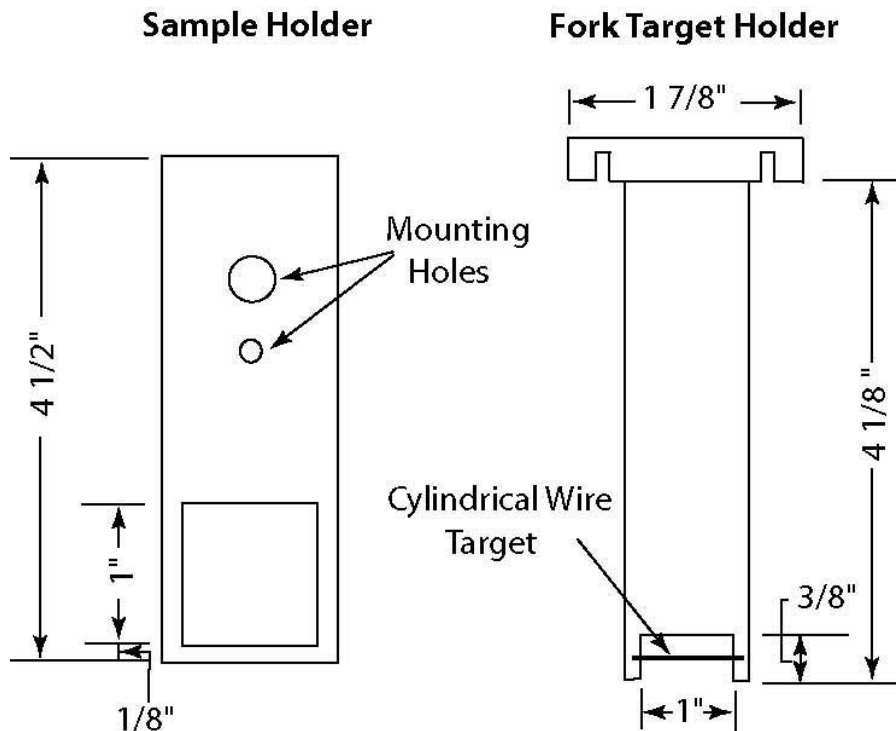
Schematic of the sample holder and fork target holder with some relevant dimensions. The thickness of the sample holder wall is 1/8" and that of the fork target holder is 1/4".
